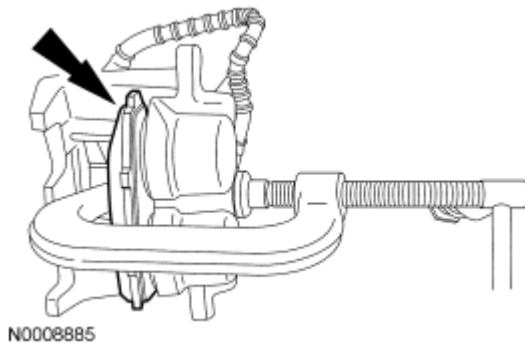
Compressing Brake Caliper Pistons Into Caliper
